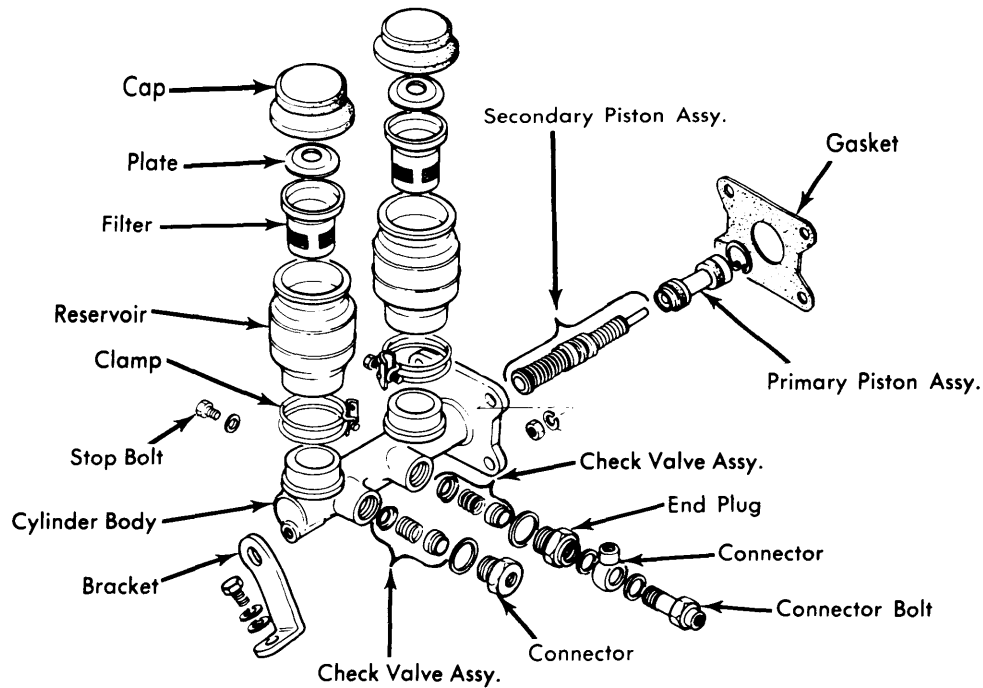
Master Cylinder Reservoir, Body and Piston Assembly
